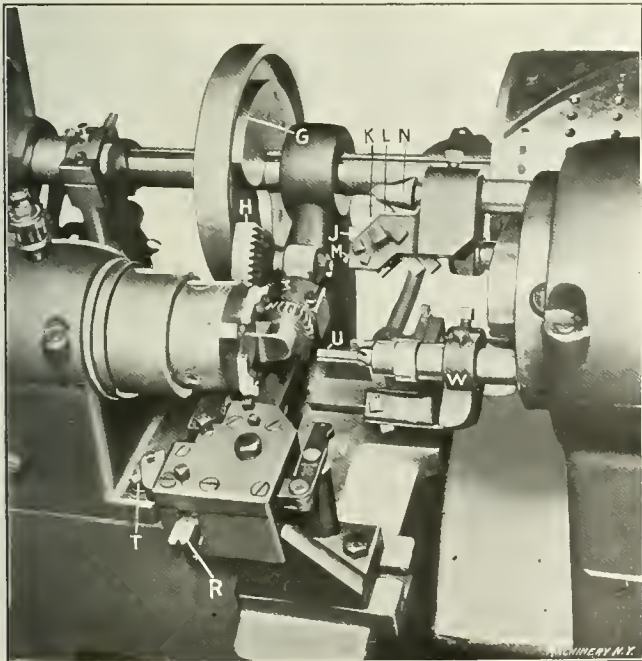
Cleveland Automatic Chucking Machine Set up for Machining Sewing Machine Handwheel
